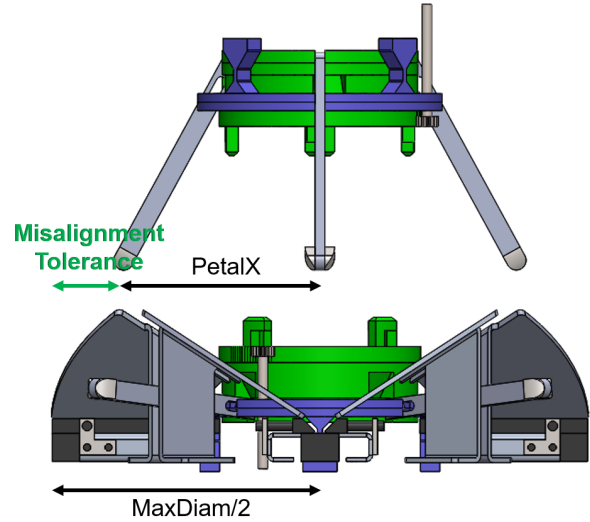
Visual aid to calculate the misalignment tolerance: A mechanism (without its outer components) approaching another mechanism to connect.
